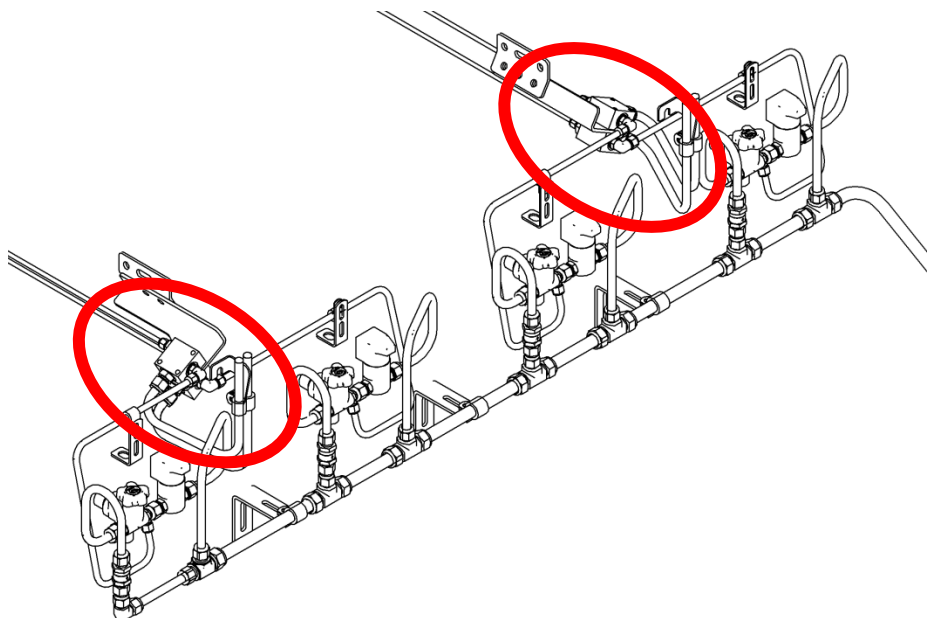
Roof-mount bus system layout. PRDs are mounted on brackets bolted to fuel system chassis frame rails. (Frame removed to improve clarity.)
